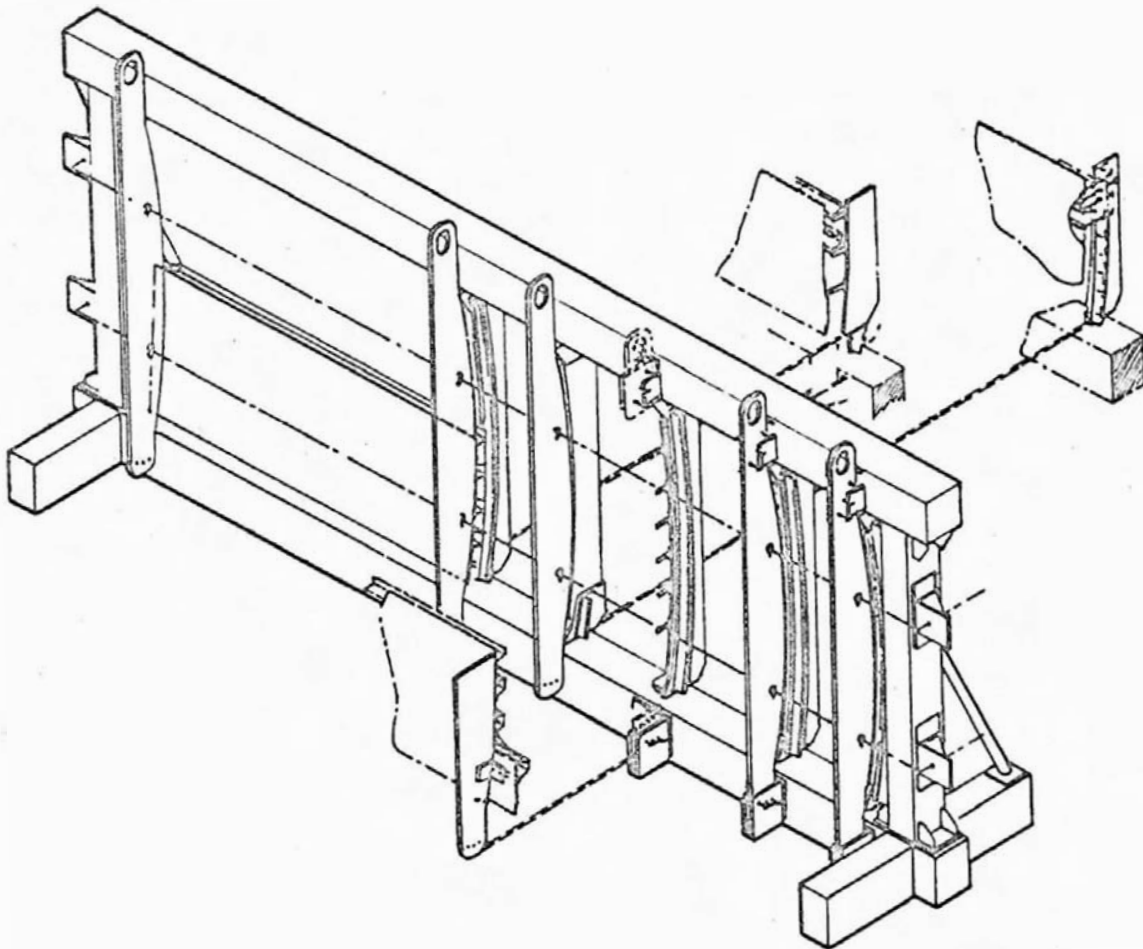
Skin Panel Assemblies Assembly Fixture AF-335-18100
